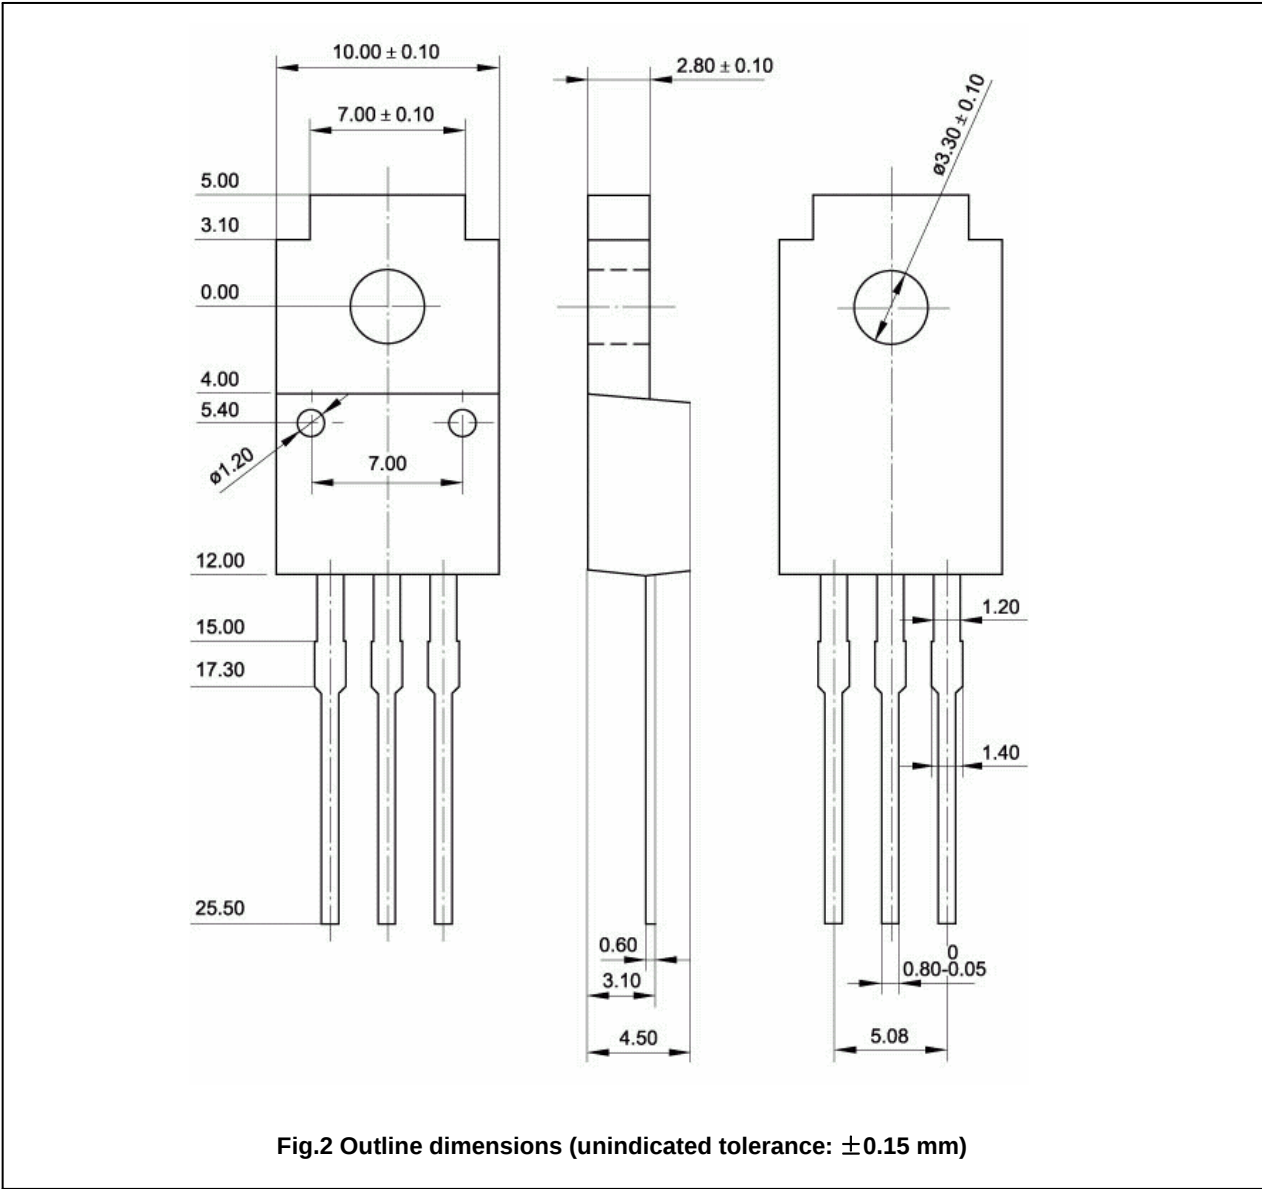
Outline dimensions (unindicated tolerance: ± 0.15 mm)
